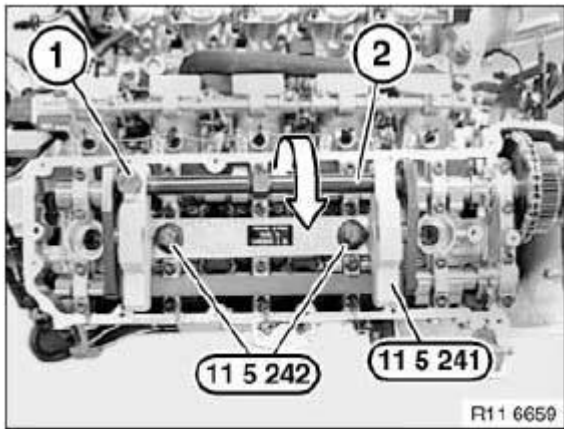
Relieving Tension On Eccentric Shaft At Hexagon Head (1 Of 2)
